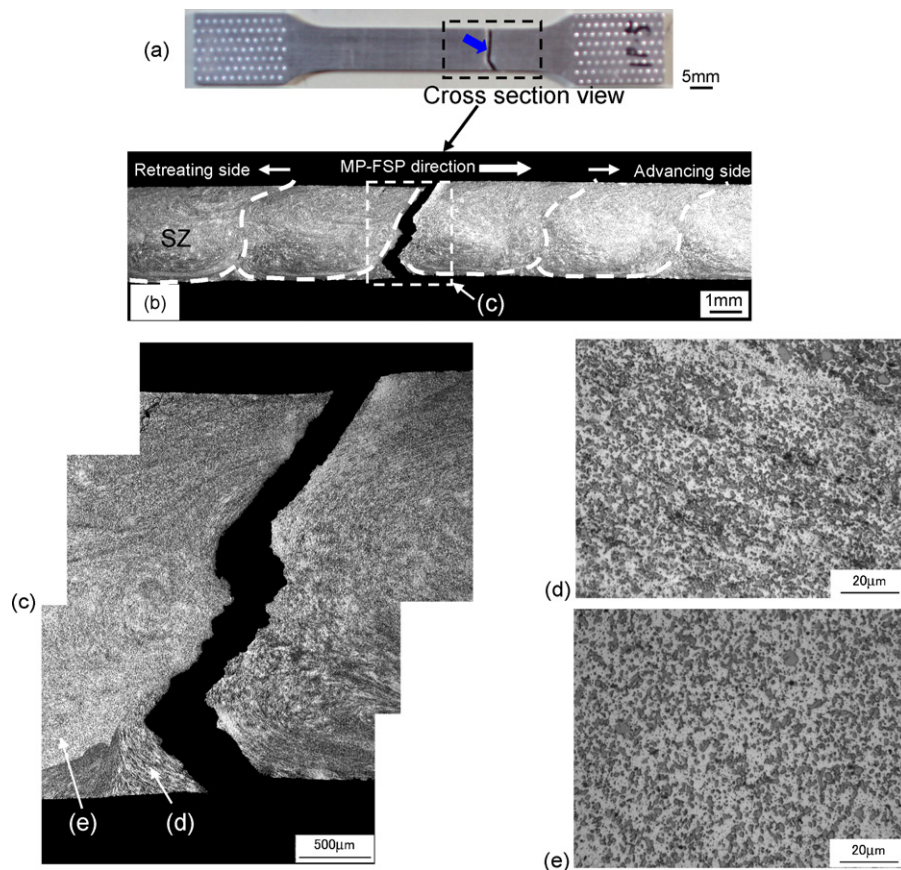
Tensile failure view of: (a) tensile test specimen of a perpendicular direction for MP-FSP, (b) cross-section showing fracture position and (c), (d), (e) are magnified optical micrographs in (b).
